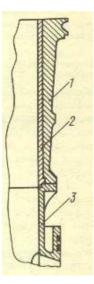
Construction cylinder liner in two layers [5]: 1 – Upper part; 2 – Insertion of iron; 3 – Lower part.
